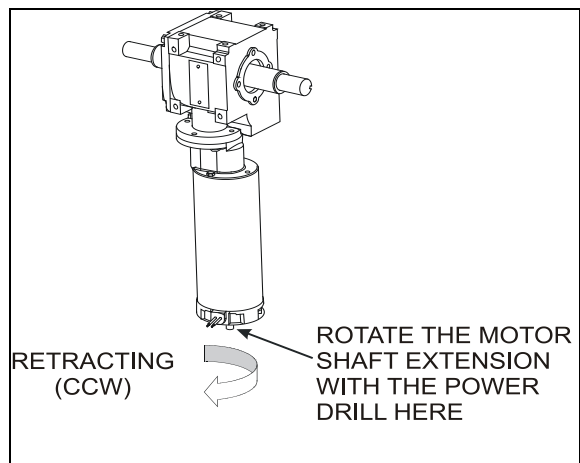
SLIDE-OUT MOTOR ROTATION
